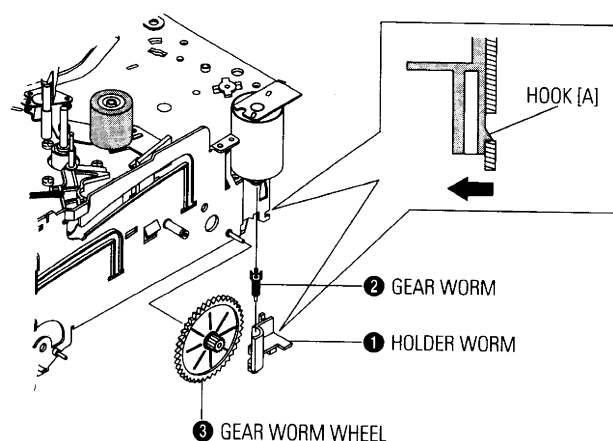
Holder Worm, Gear Worm, Gear Worm Wheel Removal
